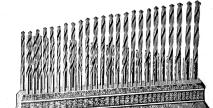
Drill set including metal carrying case and stand for 29 drills.
